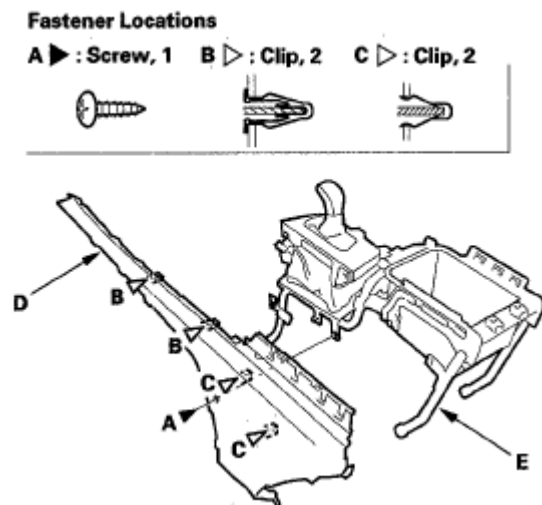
Identifying Screw, Clips, Driver's Console Panel And Console Frame
